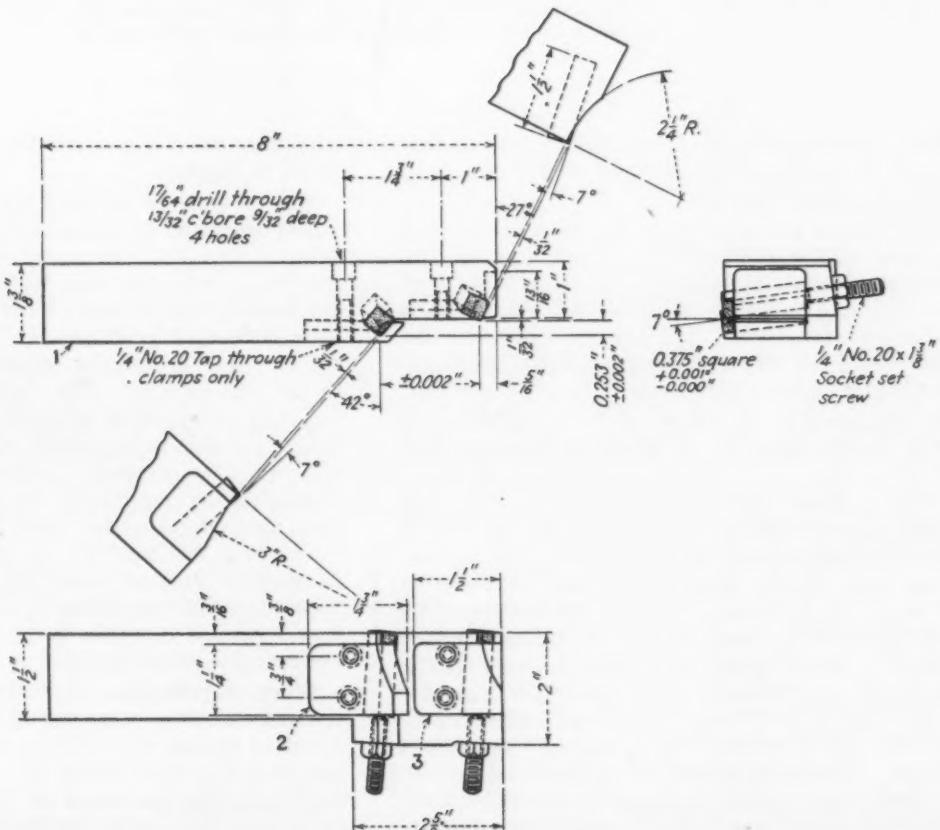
The new type tool holder developed especially for this job holds two carbide inserts for rough facing the outside of the axle flange and chamfering its OD, shown as tools 4 and 5 in the revised tooling layout of fig. 3.
